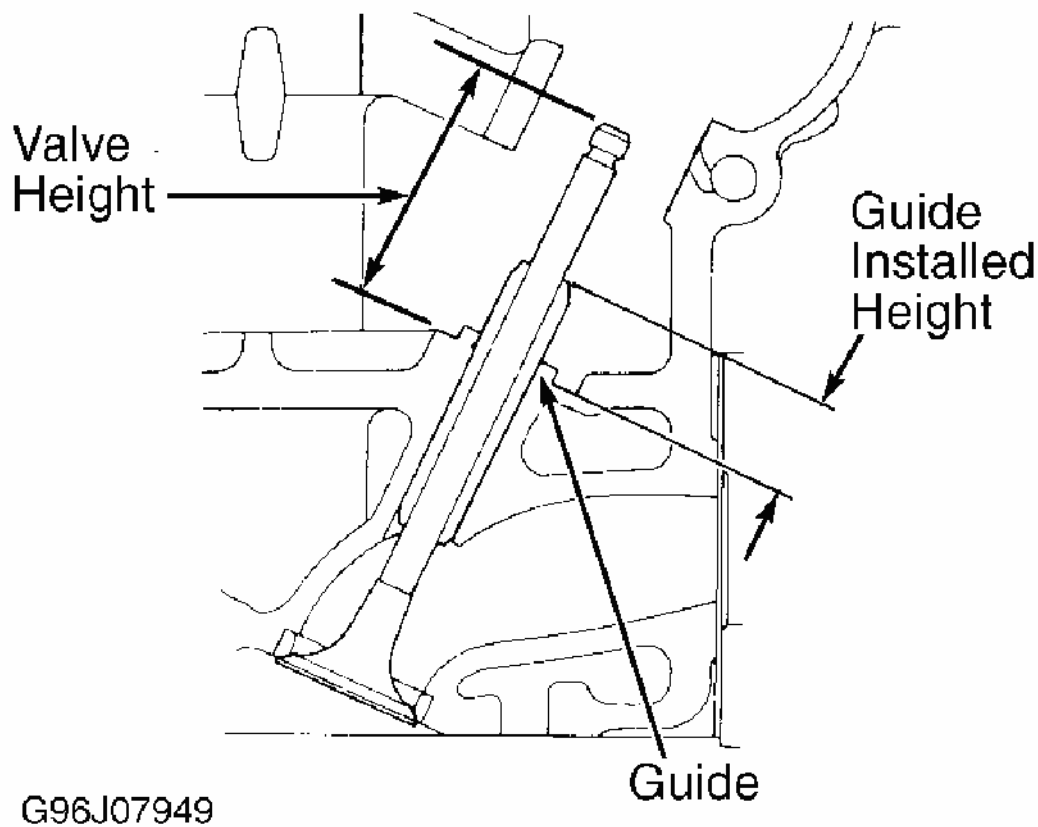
Adjusting Valve Guide Installer & Installing Guide
